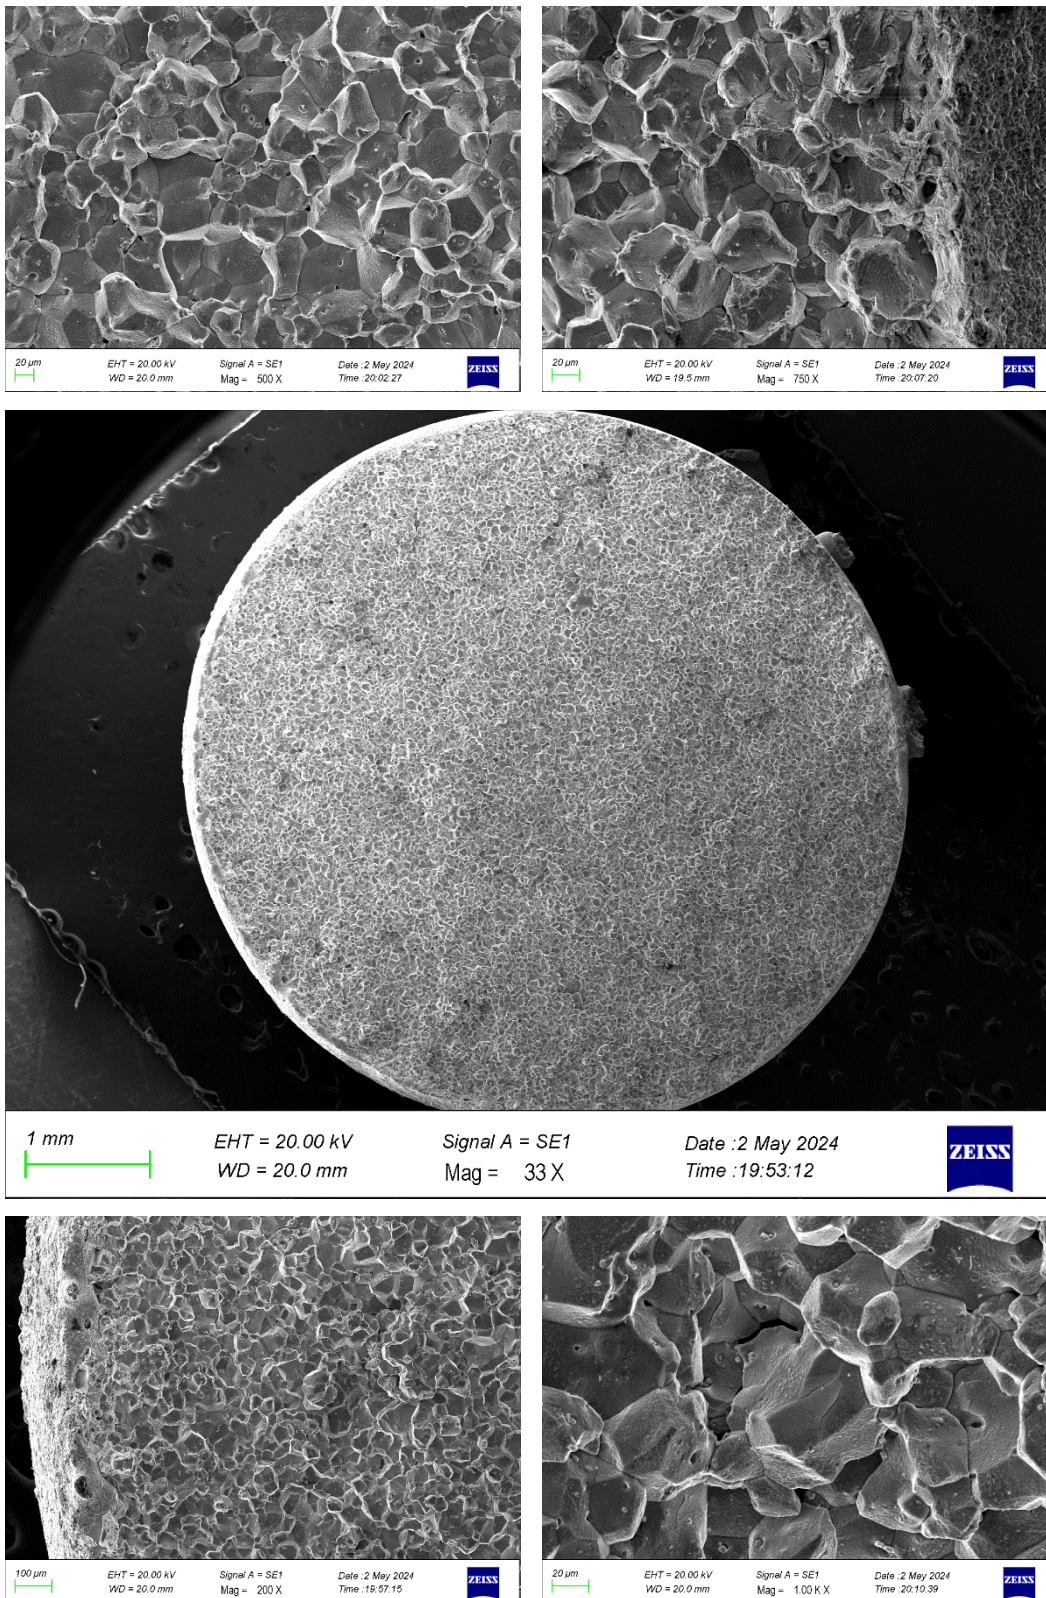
Fracture morphology under SEM after hot tensile test at 1175°C
